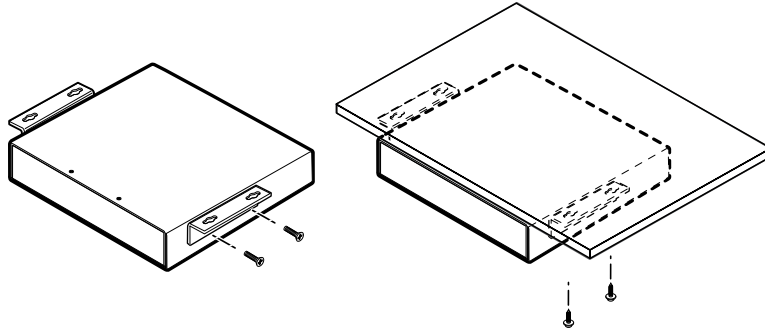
Attaching the furniture mounting brackets to an MTP SW6
